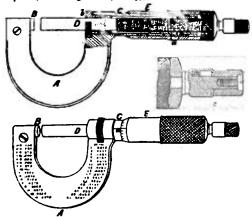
Micrometer Calipers. (Brown & Sharpe Mfg. Co.) A. Frames a, Adjusting nuts for taking up
